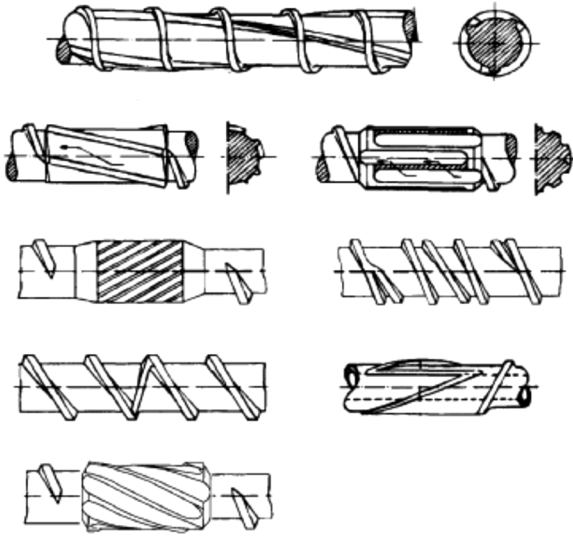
Mixing screw sections for single-screw extruders [77].
